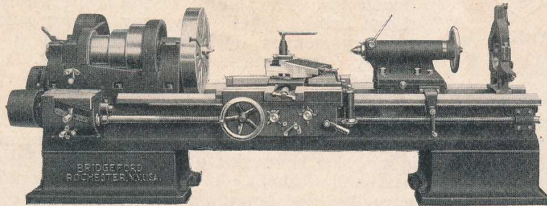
BETTS-BRIDGEFORD HEAVY DUTY CONE HEAD SCREW CUTTING LATHE, TYPE A1100
